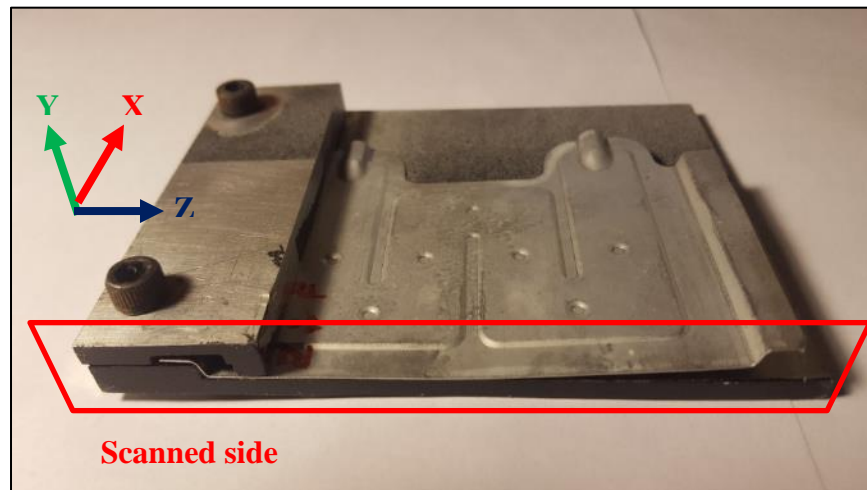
Springback measurement jig with SHC in position used for springback measurement
